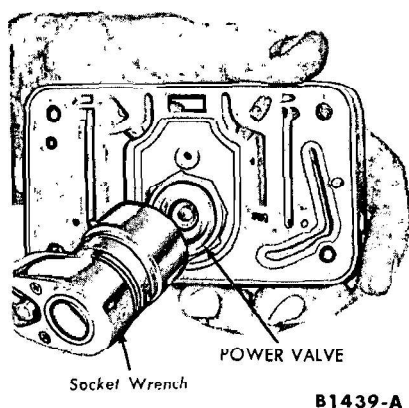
Power Valve Removal or Installation—Holley 4-V
